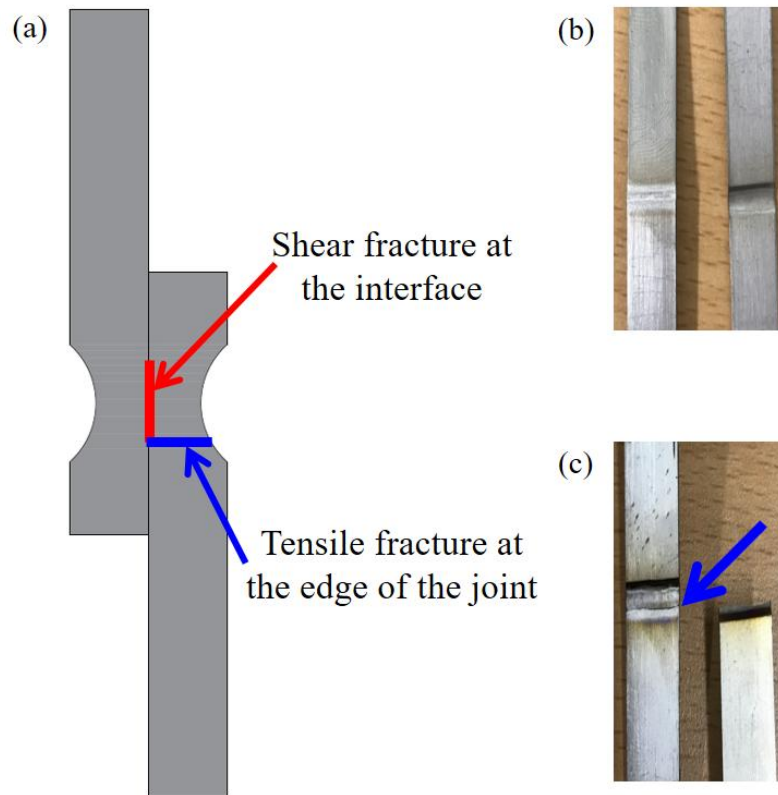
(a) Schematic of fracture modes; EAPJ joints fractured by (b) shear fracture mode and (c) tensile fracture mode.
